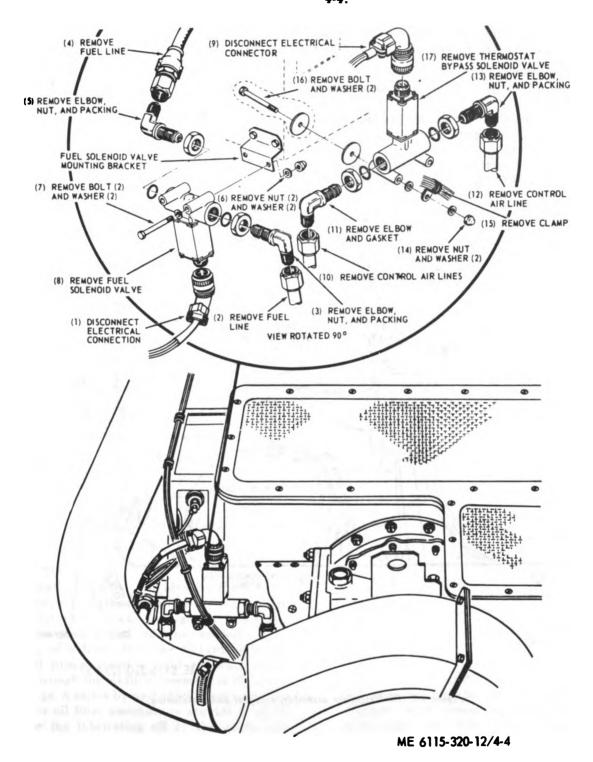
Fuel solenoid valve and thermostat by-pass solenoid valve, removal and installation.
